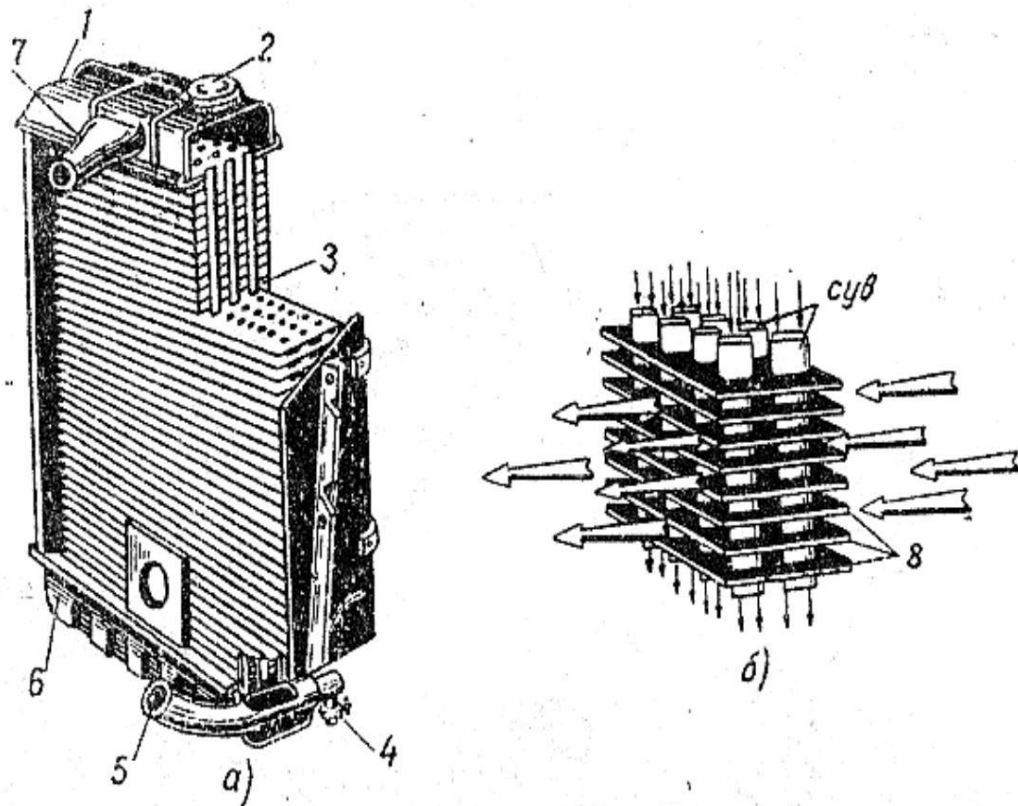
Radiator and its pipes. a- radiator; b-elongated cut pipes; 1-upper tank; 2-plug; 3-core; 4-draining tap; 5-lower short pipe; 6-lower tank; 7-upper short pipe; 8-brass plates;
